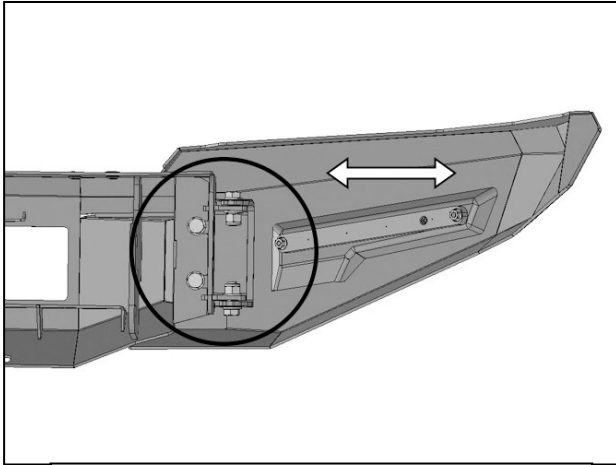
Unfold outer Wings from center Bumper. Passenger/right side illustrated from below
